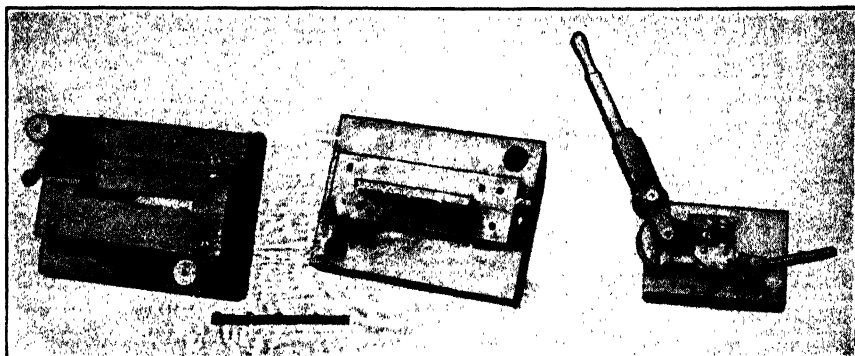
Blanking and bending tools for work in Fig. 36.
